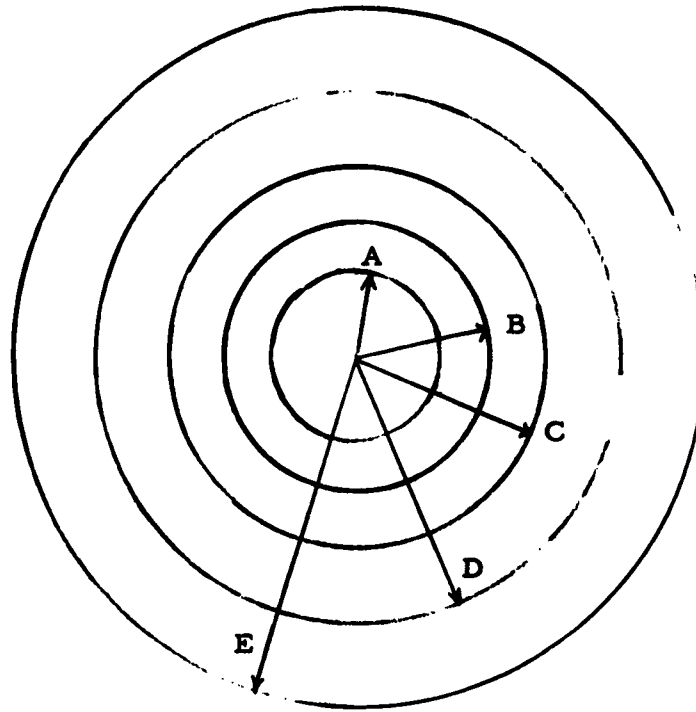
LINER AND THREE-SLEEVE ASSEMBLY
